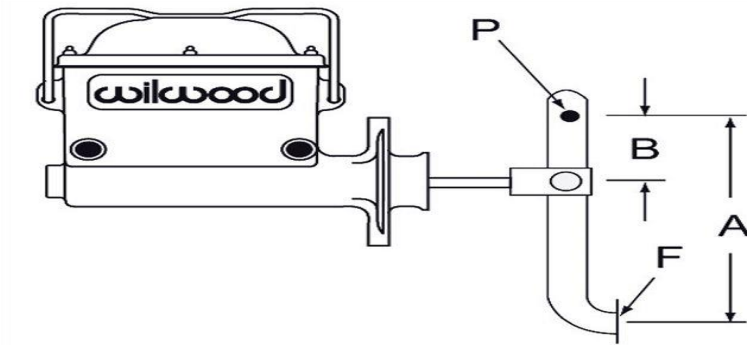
Brake Pedal and Master Cylinder Assembly
